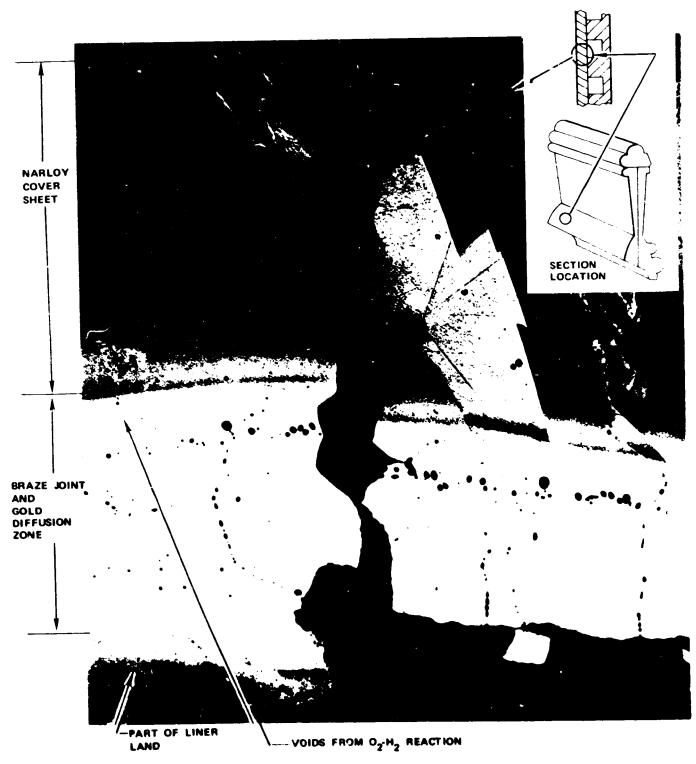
Section Through Crack in Outer Cover Sheet of Segment 510 (200X)
